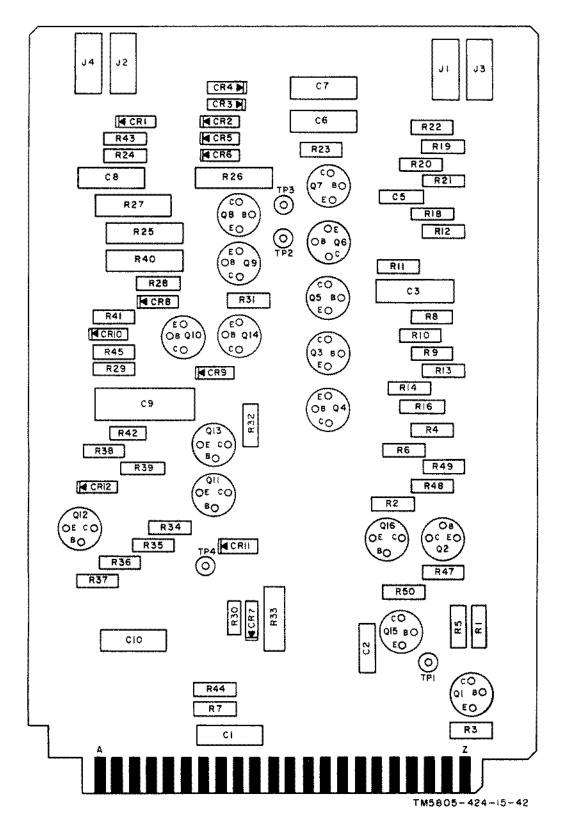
Printed-circuit card assembly A9 (PC 80034050), component location diagram.
